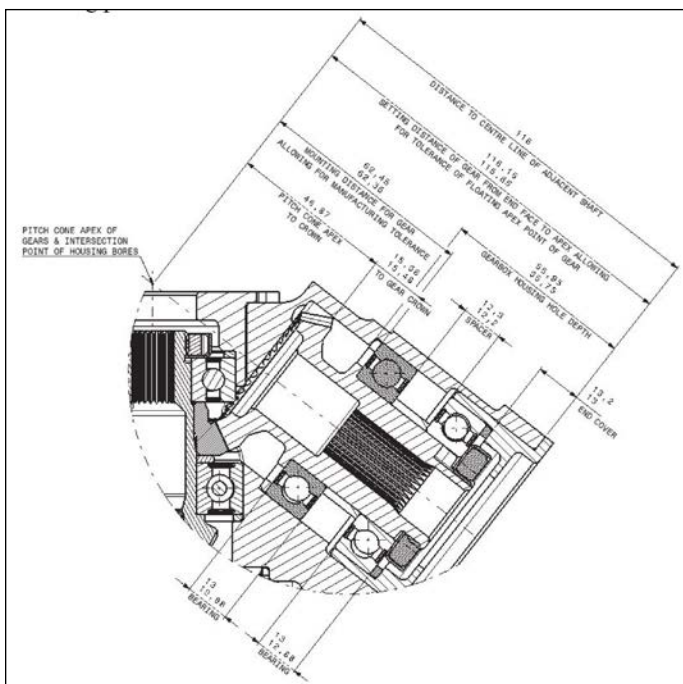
Designers can choose any bevel gear in determining the range of shims for that specific gear. For assembling by the fitter, the center gear would be the logical starting point.
